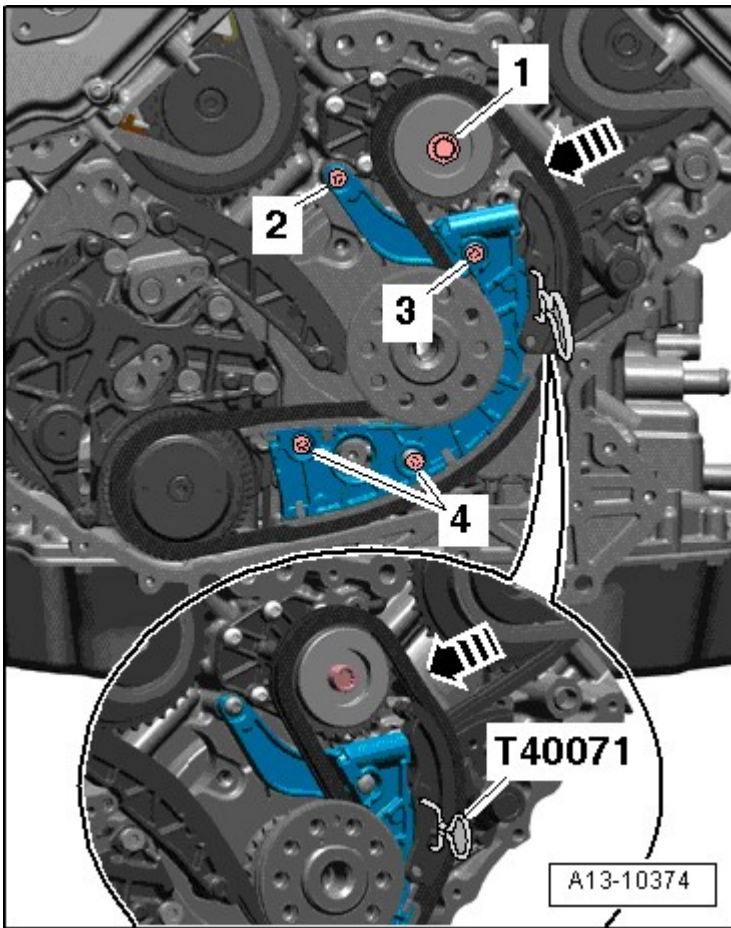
Pressing Tensioning Rail And Securing Chain Tensioner With Locking Pin T40071
